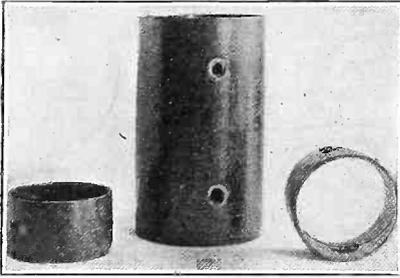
, the forms used for coil winding. At left and right are the rotor forms and in center the stator, with the two shaft holes for the rotor rods. The stator form is a cardboard tubing of $3\frac{1}{4}$ " outside diameter, $5\frac{1}{2}$ " high.
